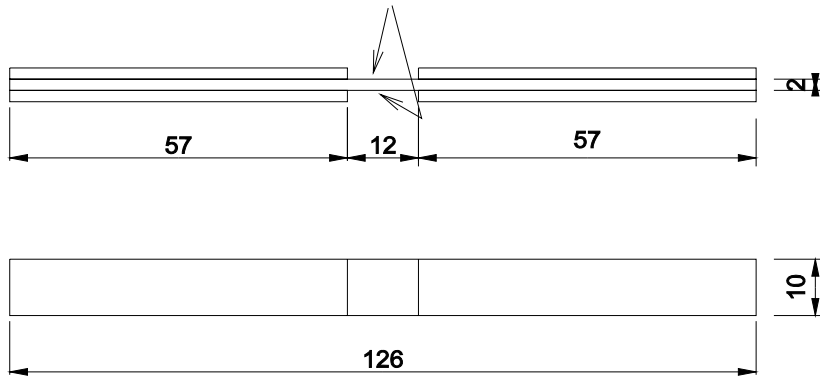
Compression test specimen, ISO 604 CFRP, Risø Fixture, (Geometry 2).
